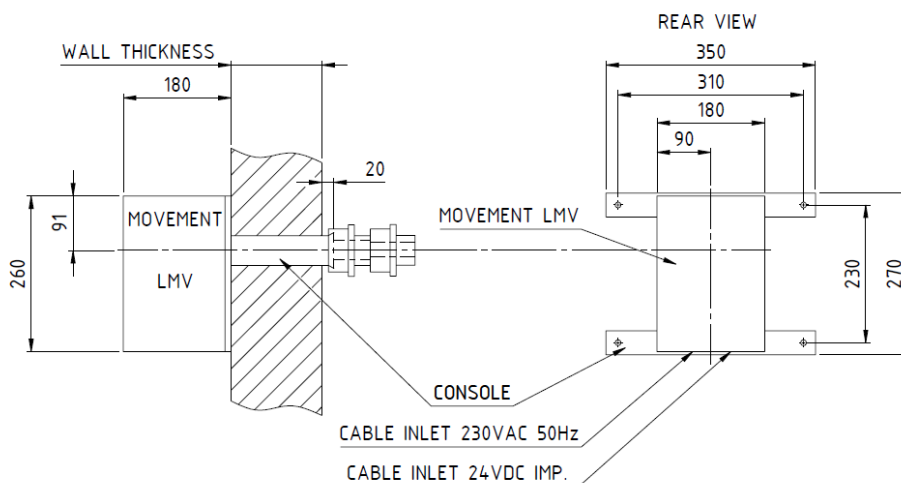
Sketch LMV Rec. drill-hole for hand shaft: Ø50 mm
